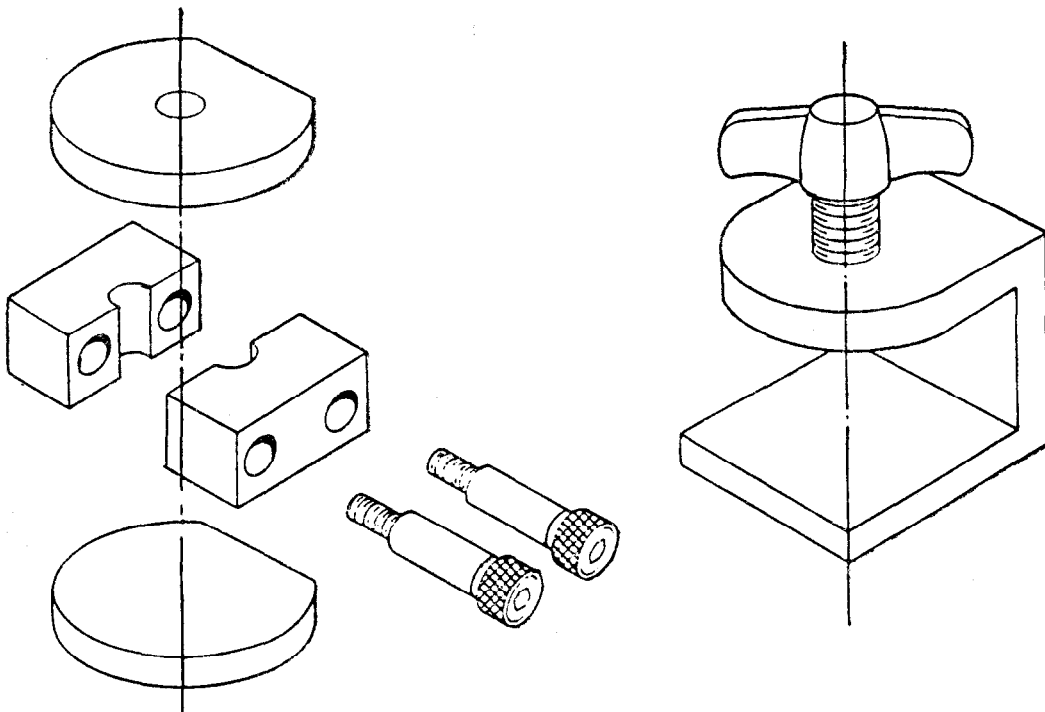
MOULD AND CLAMP FOR PREPARATION OF COMPRESSIVE TEST SPECIMEN
